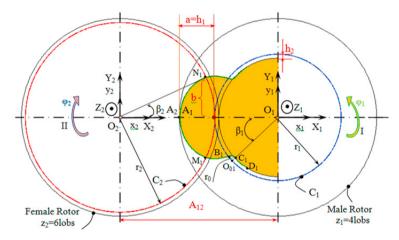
Front view of profiles of rotors, compressor components, of elliptic shape.
